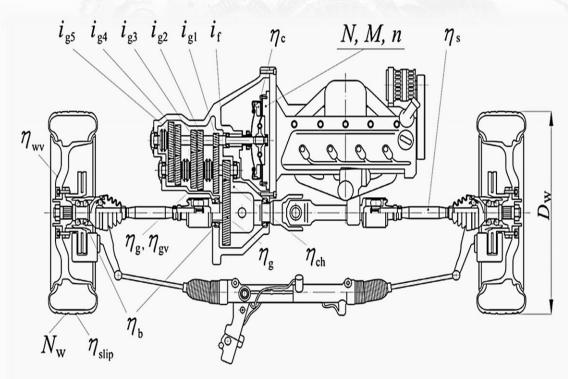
Section of a 5-speed front-wheel drive and transverse-mounted transmission.
